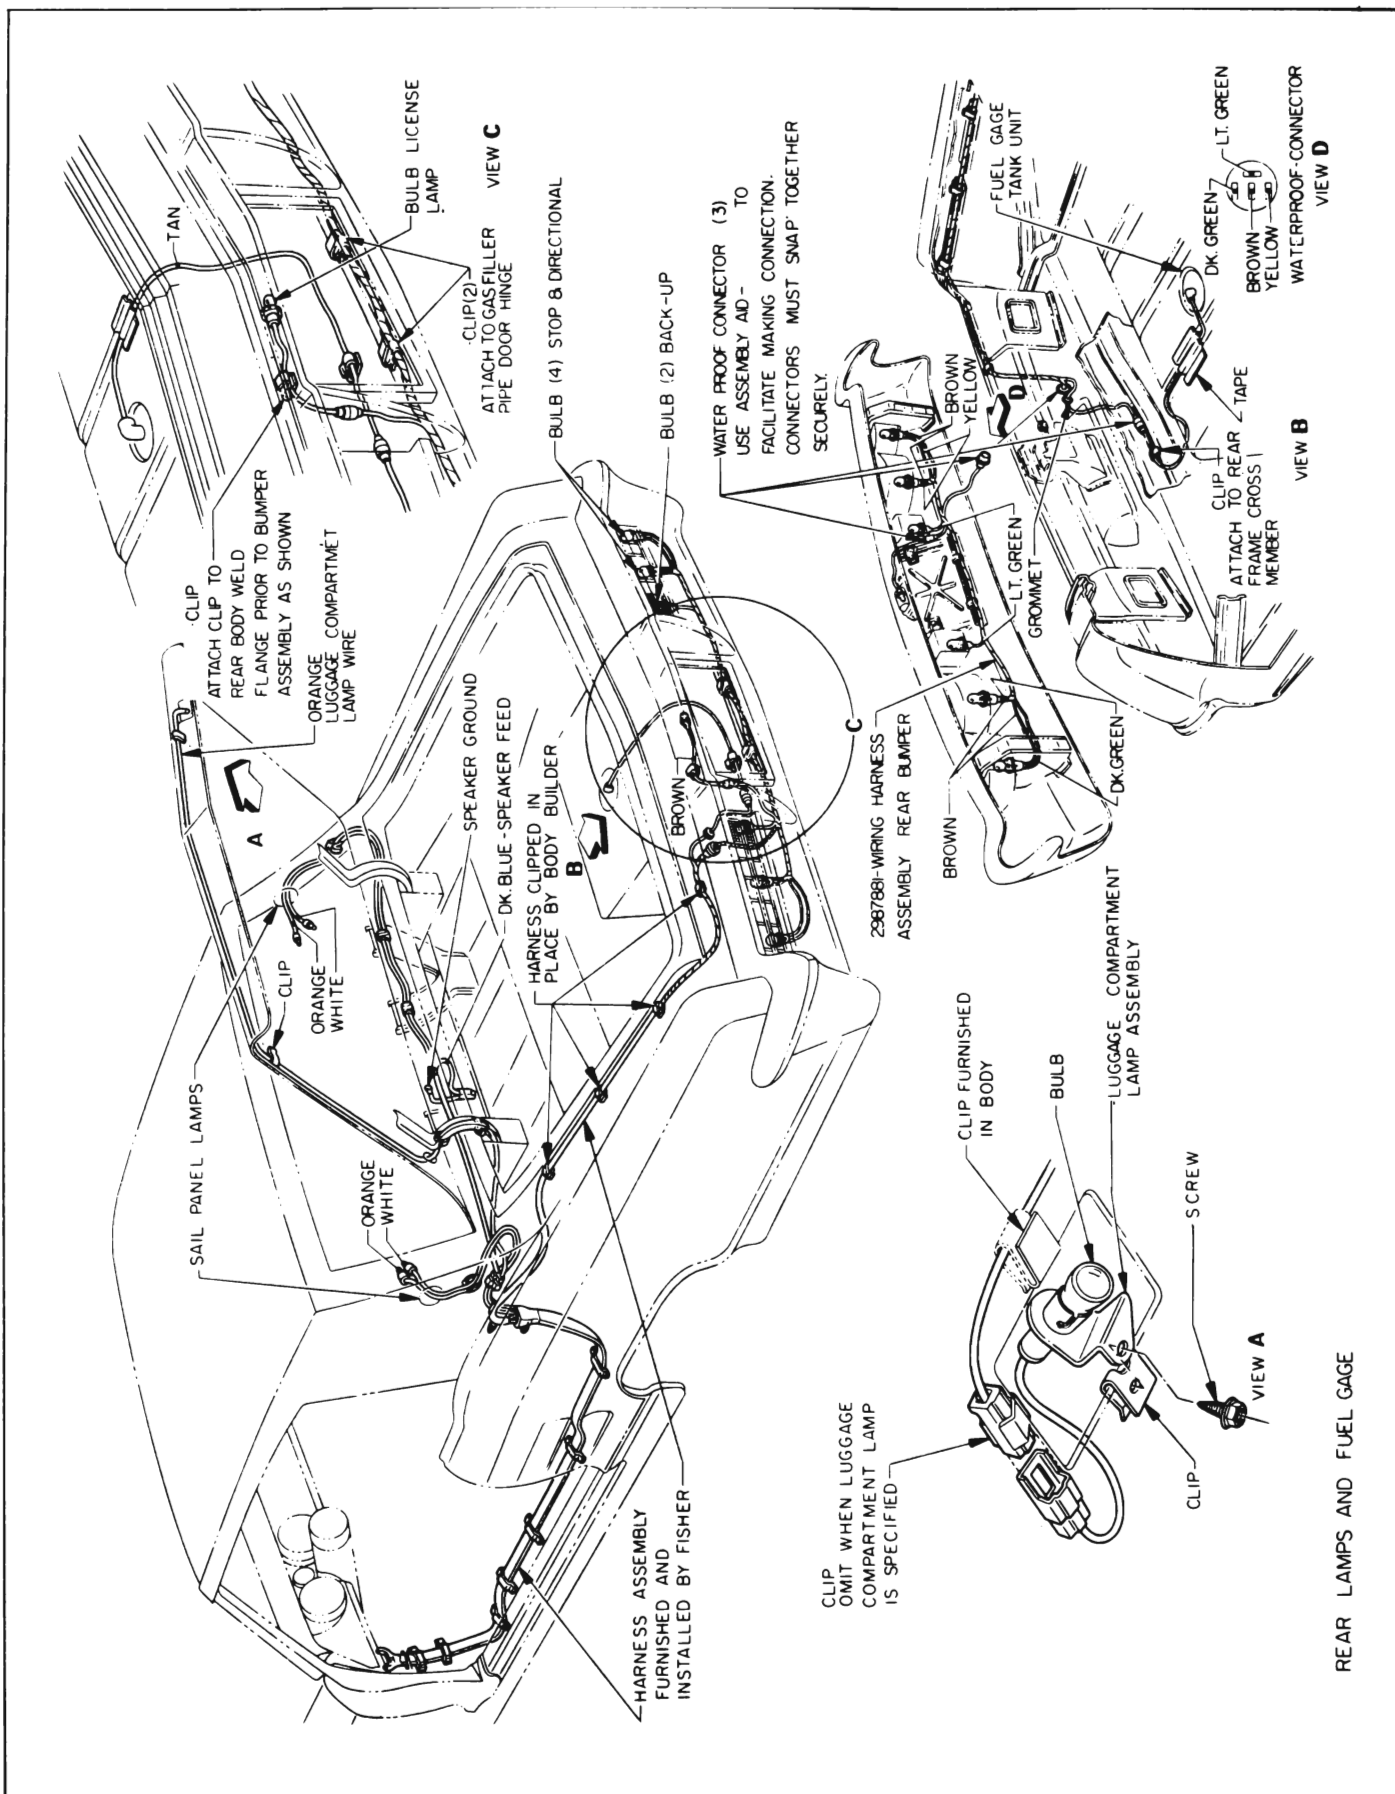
Rear Lamp and Fuel Gauge Wiring - Riviera
